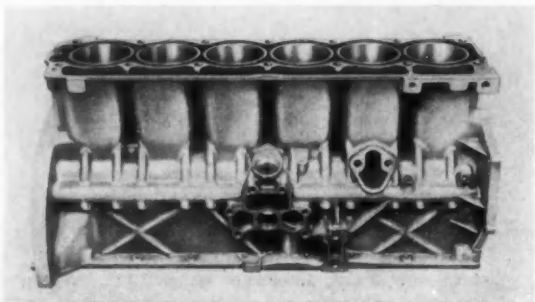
Right side view of Chrysler die-cast aluminum cylinder block.
